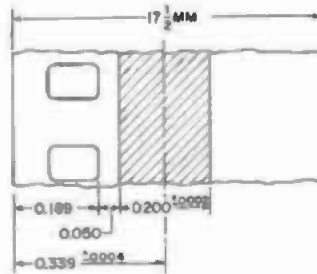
Sound track placement dimensions for 17.5-mm magnetic film.
